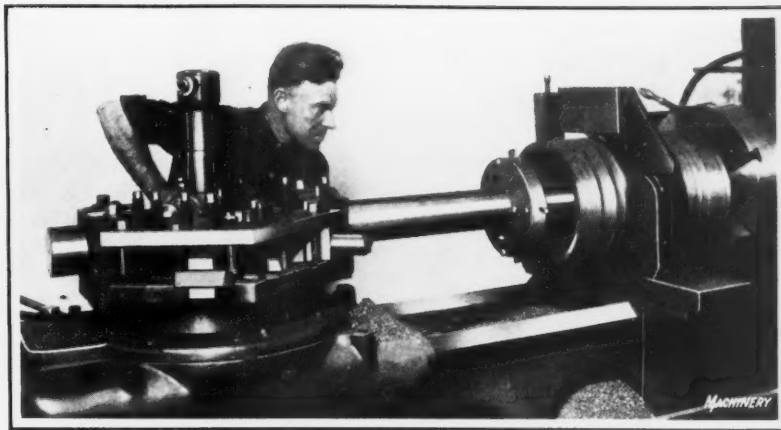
Boring the Drum for the Full Length by employing a Piloted Head equipped with Four Cutters
